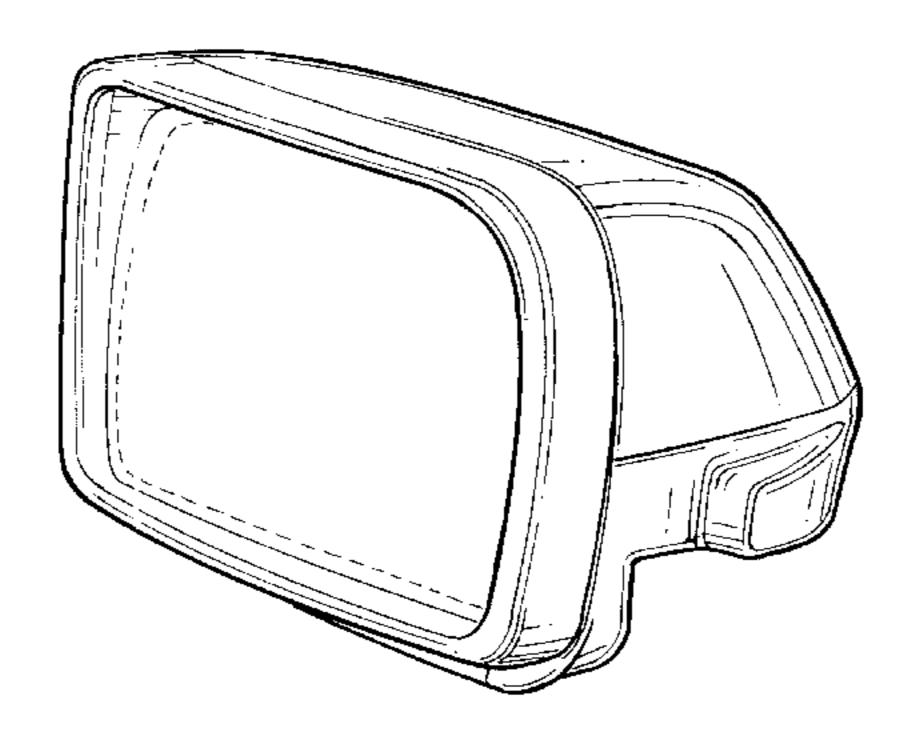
is a front left side perspective view of the second embodiment of the combined vehicle mirror and housing;
